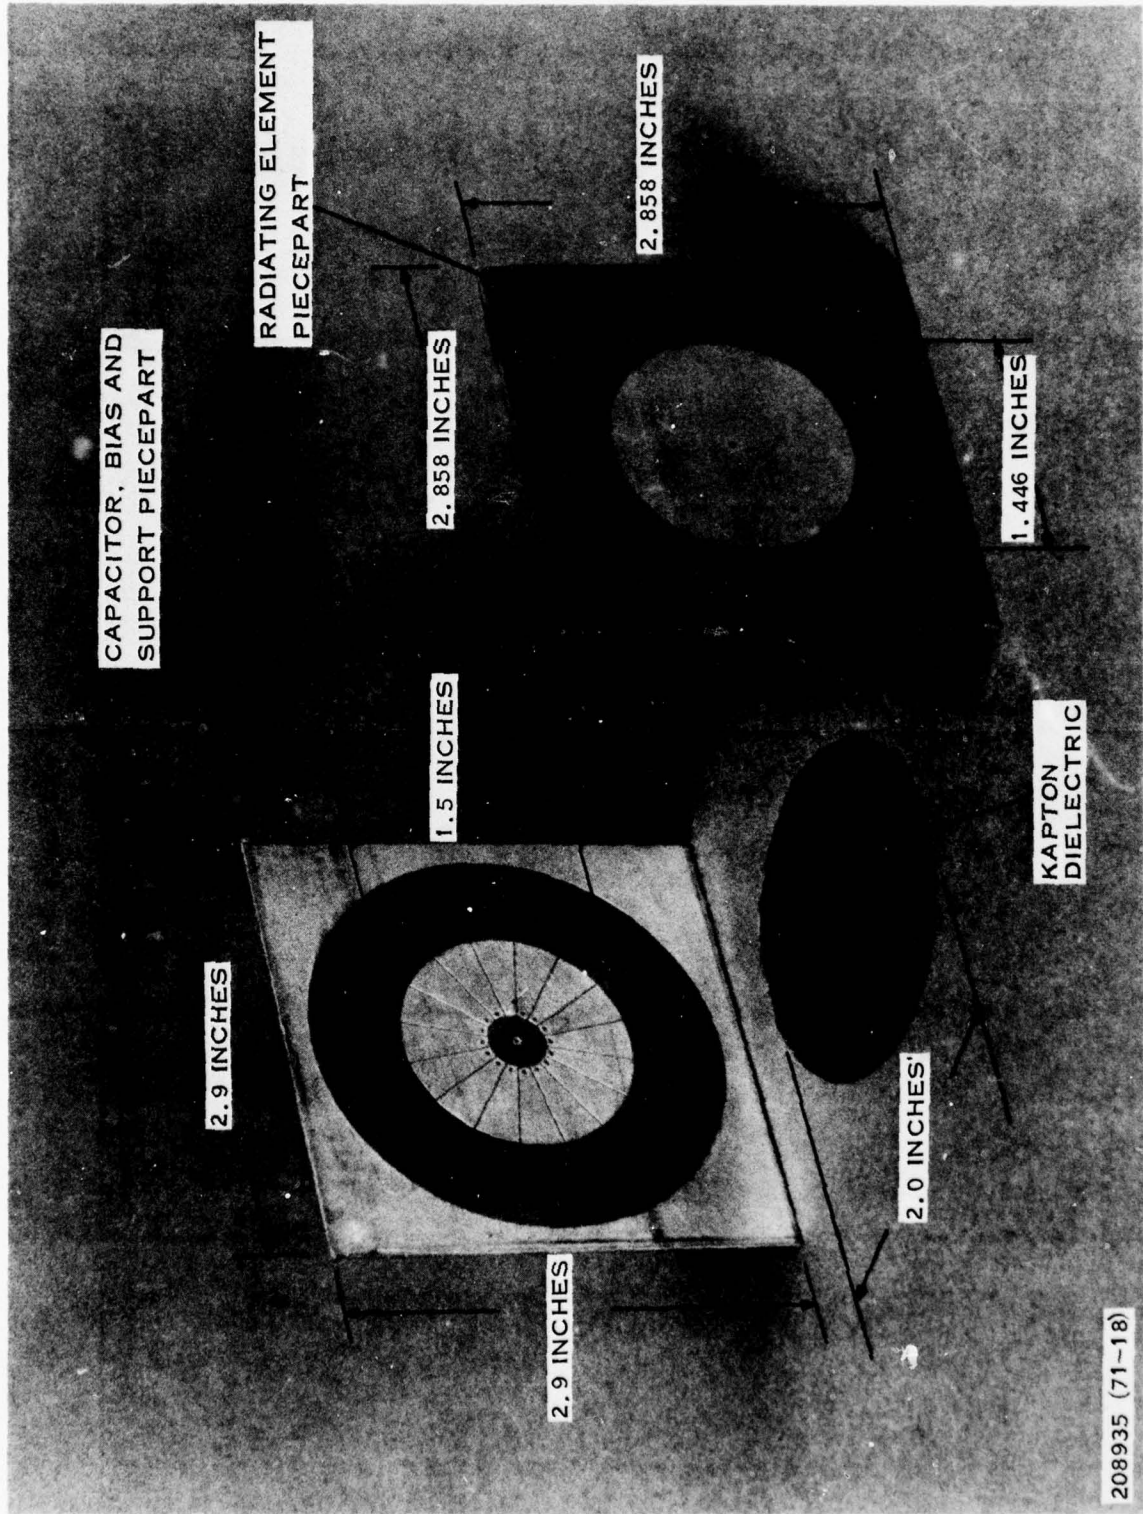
Reflectarray Microstrip Element Exploded View - Front Side
